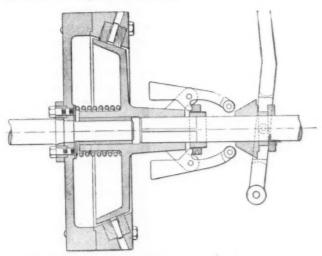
CLUTCH WITH WOODEN FRICTION BLOCKS
